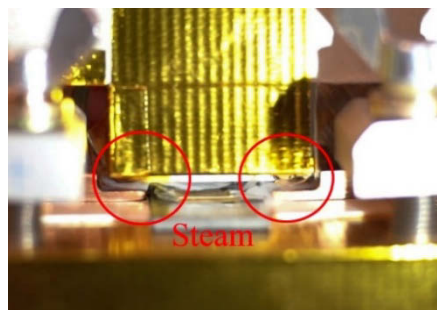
Steam ejection during the welding process for 5 μl water.
